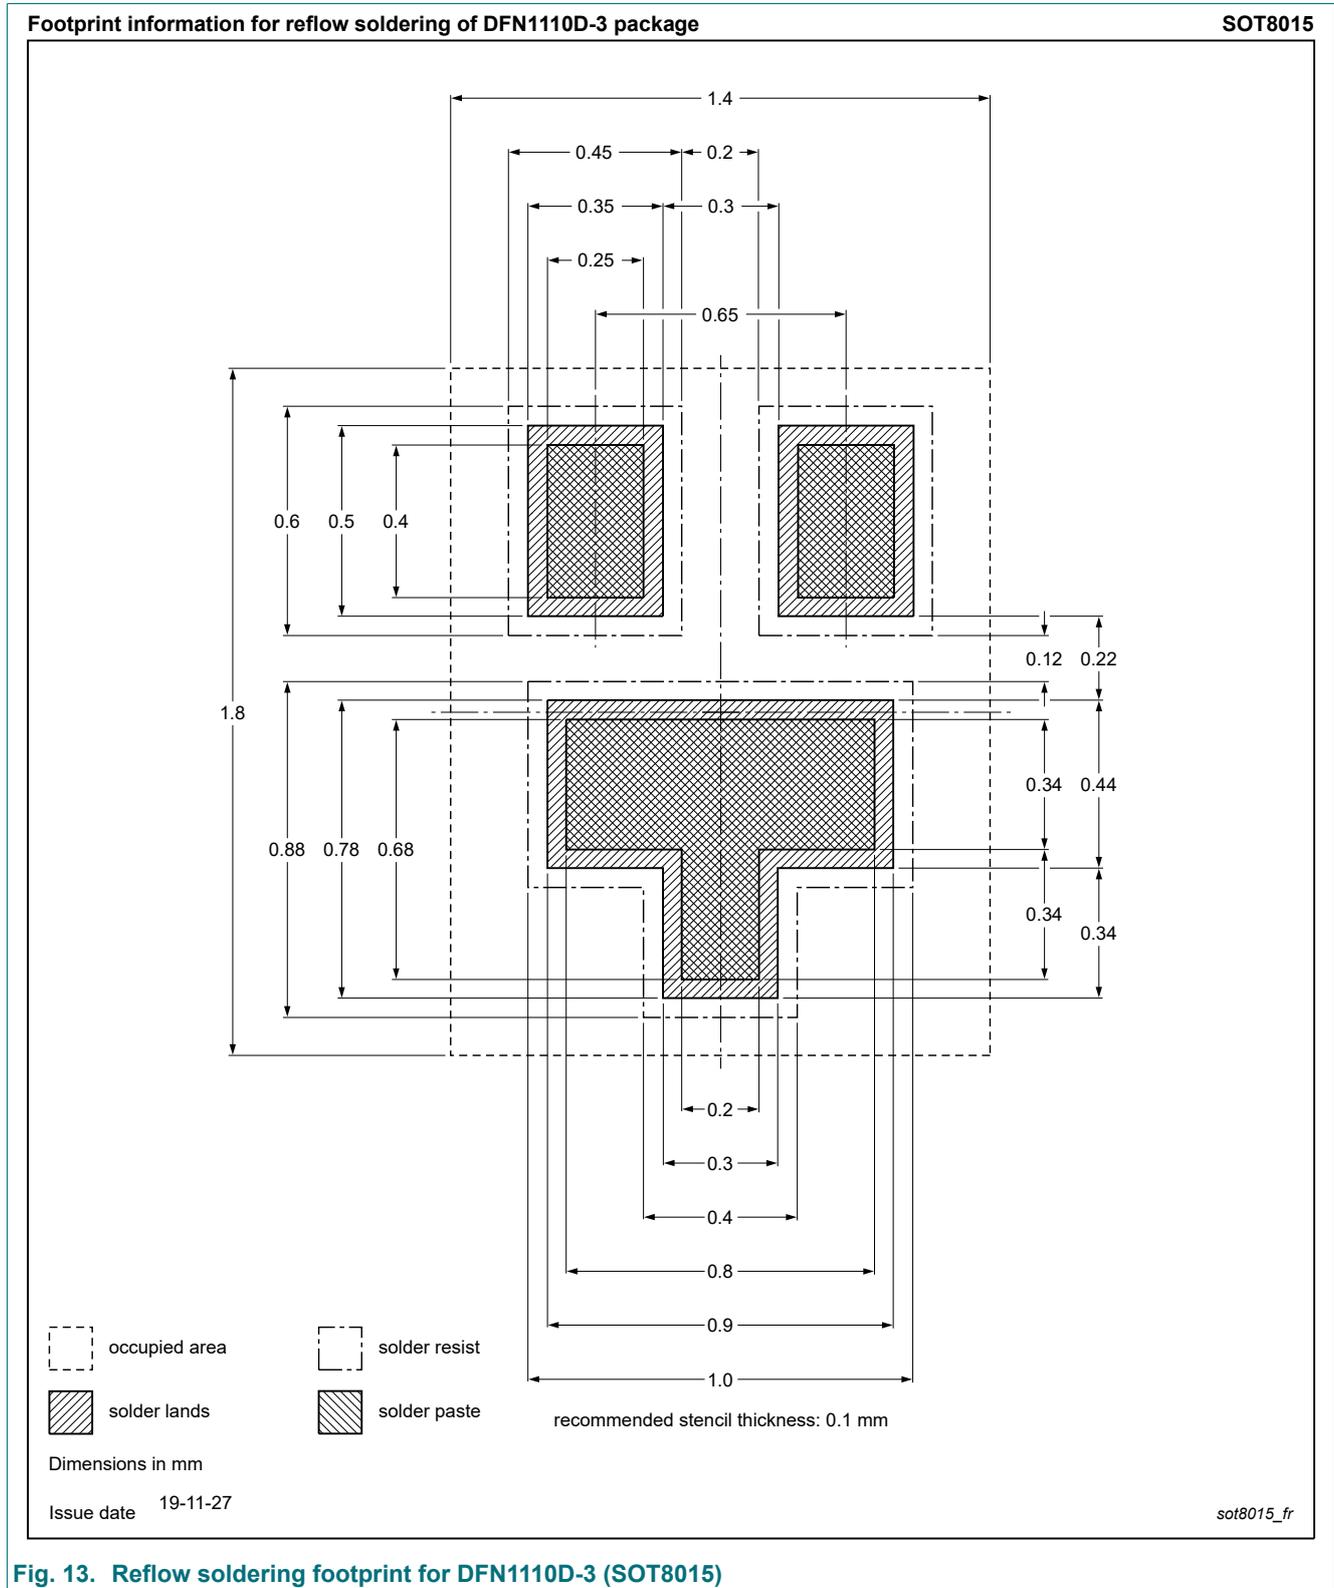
Reflow soldering footprint for DFN1110D-3 (SOT8015)
